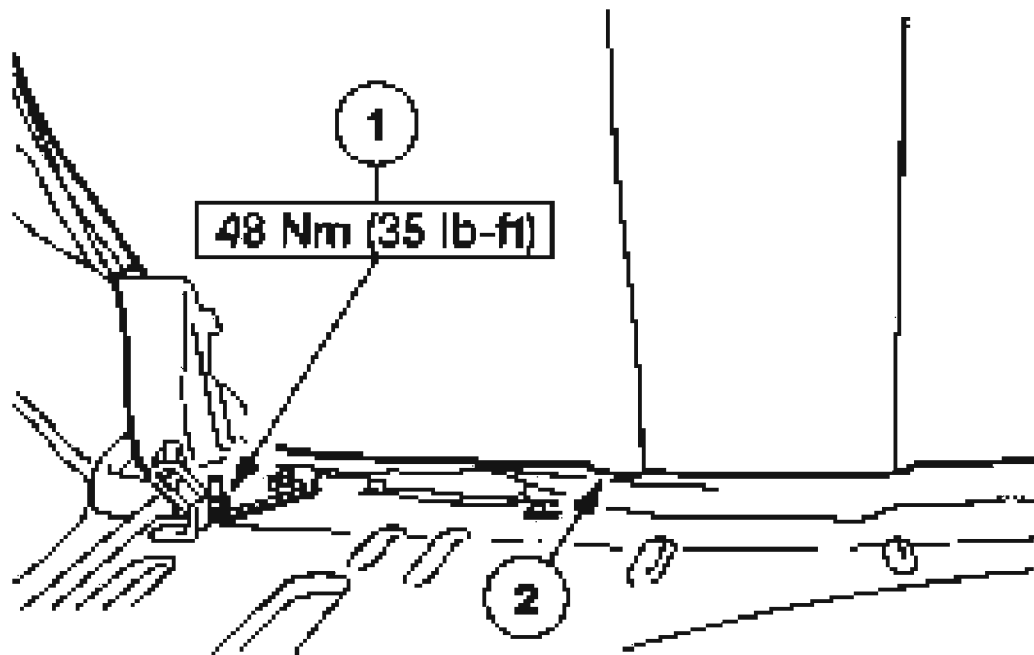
Identifying Tightening Sequence & Torque Specification Of 40% Rear Seat Backrest Nuts And Bolts
